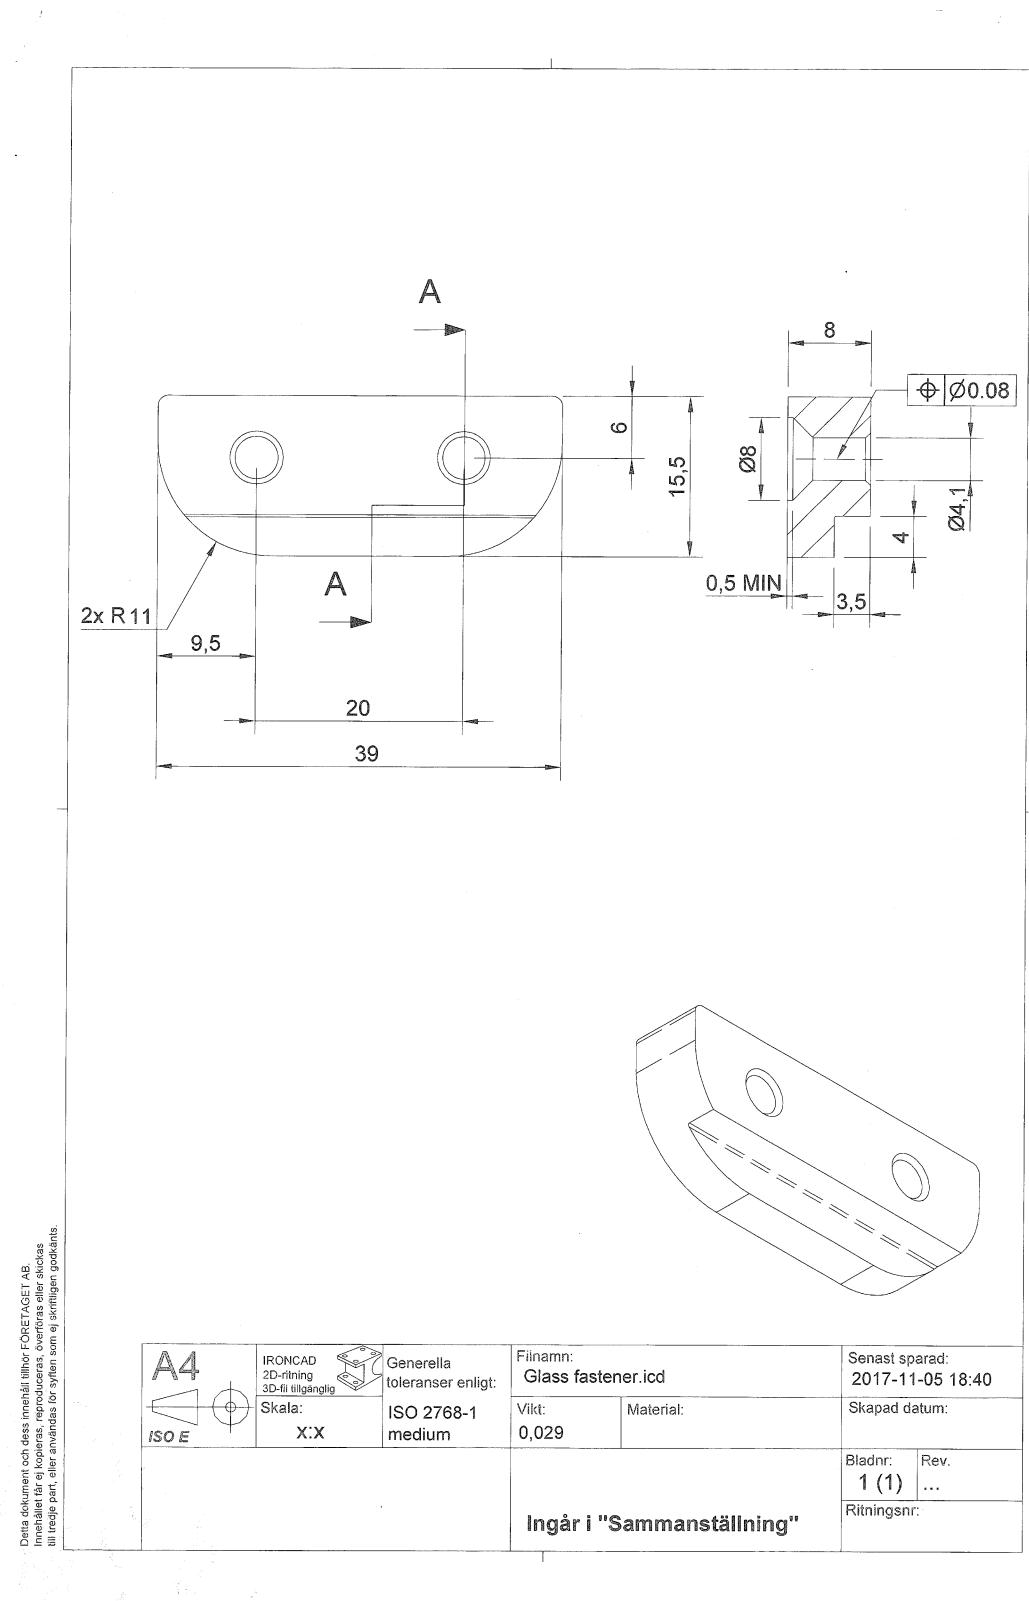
Technical drawing of the glass fasteners for the SVA chamber lid. Distances are given in mm.
